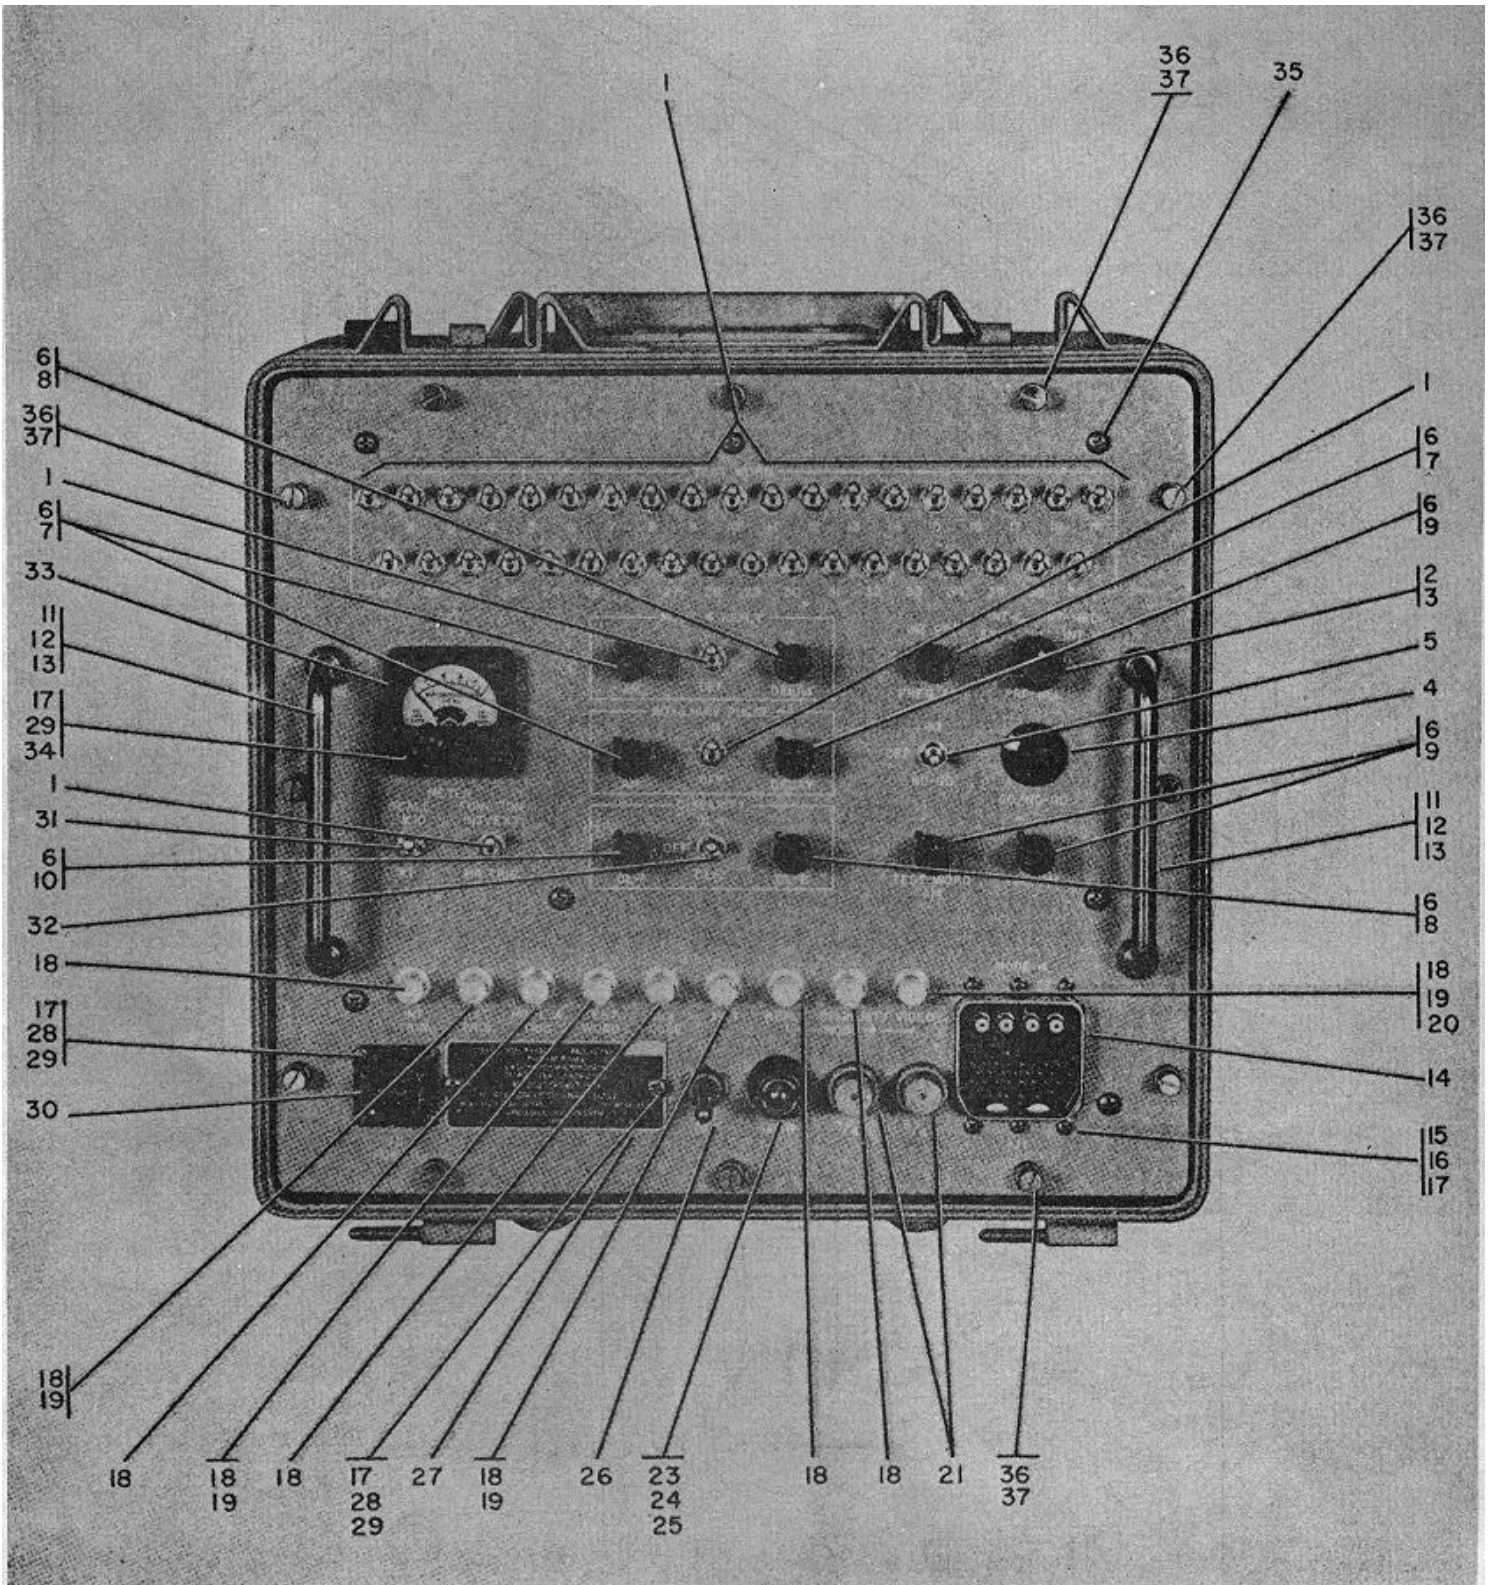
Panel and Chassis Assembly, Test Set Simulator (Sheet 1 of 2)
